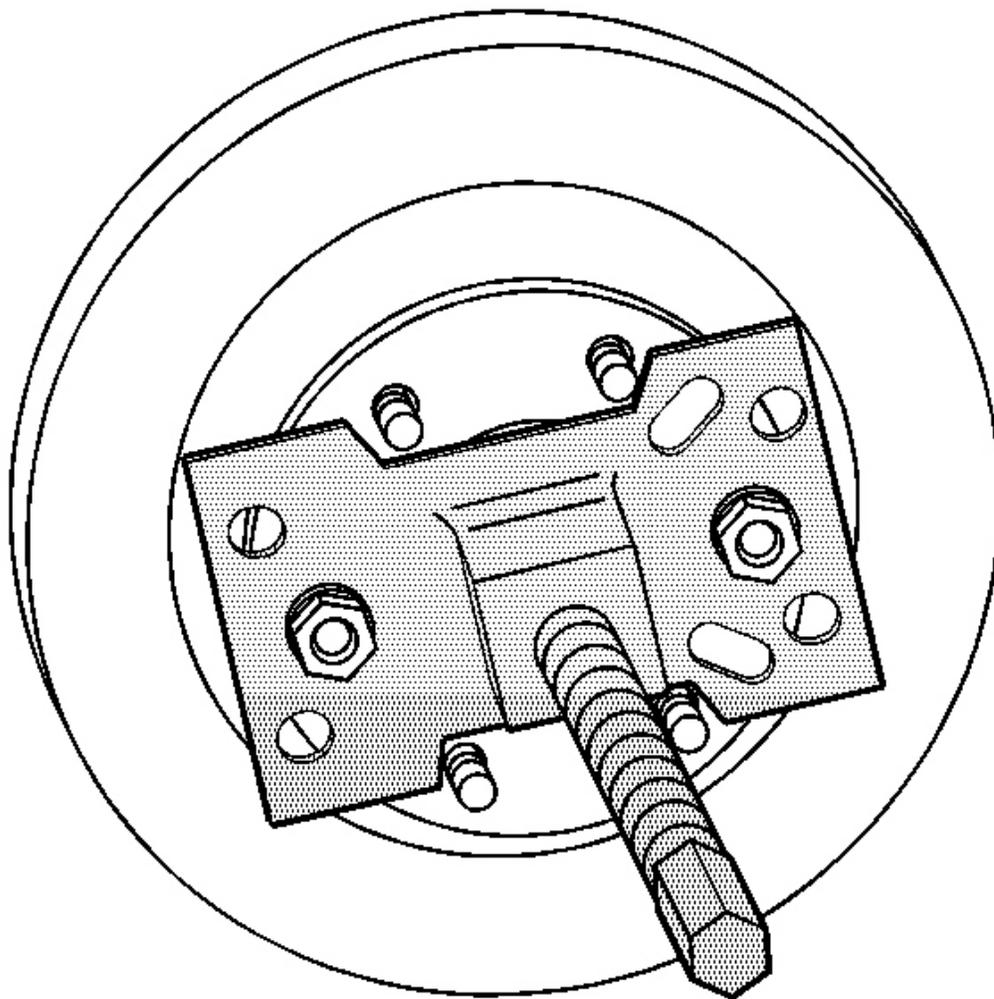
View Of J 45859 Installed Onto Wheel Hub
